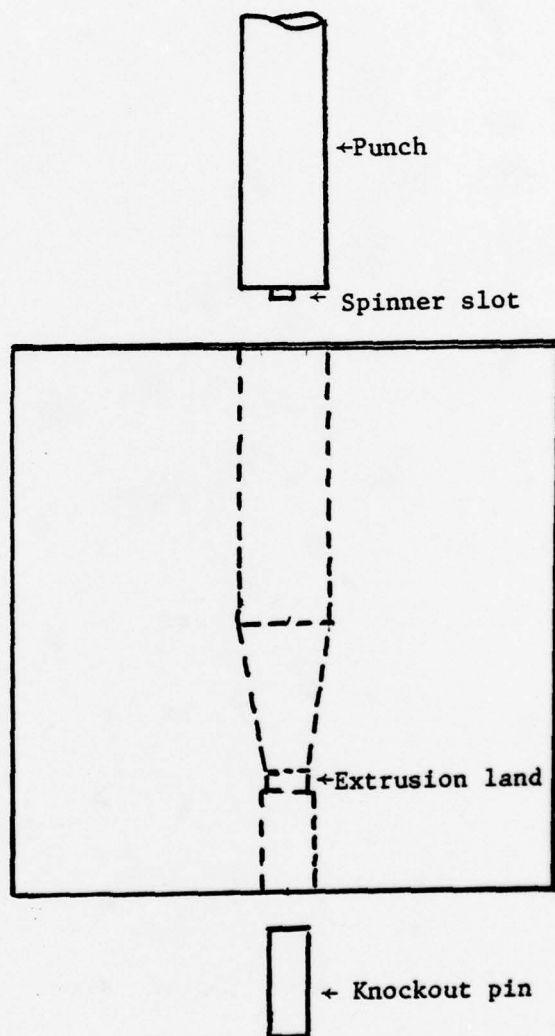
Line sketch of die for forging Phalanx penetrator. Die material is carbide. Heated, lubricated blank is placed in die, punch attached to movable head of press, is lowered a controlled amount and withdrawn. Knock out pin forces part out of die
